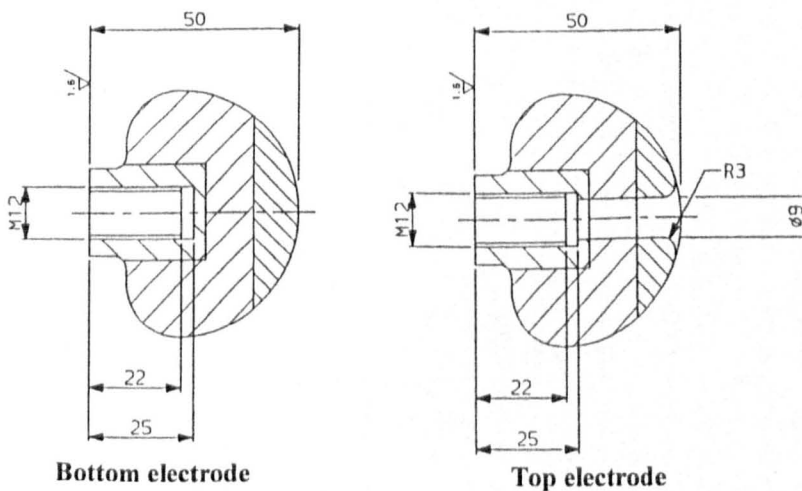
Geometry and dimensions of the electrodes in the auto-expansion arcing device. Unit is in mm.
